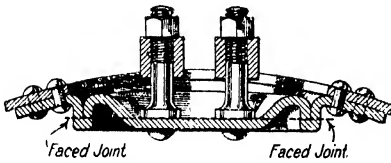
PRESSED-STEEL OR McNIELL-TYPE MANHOLE DOOR
